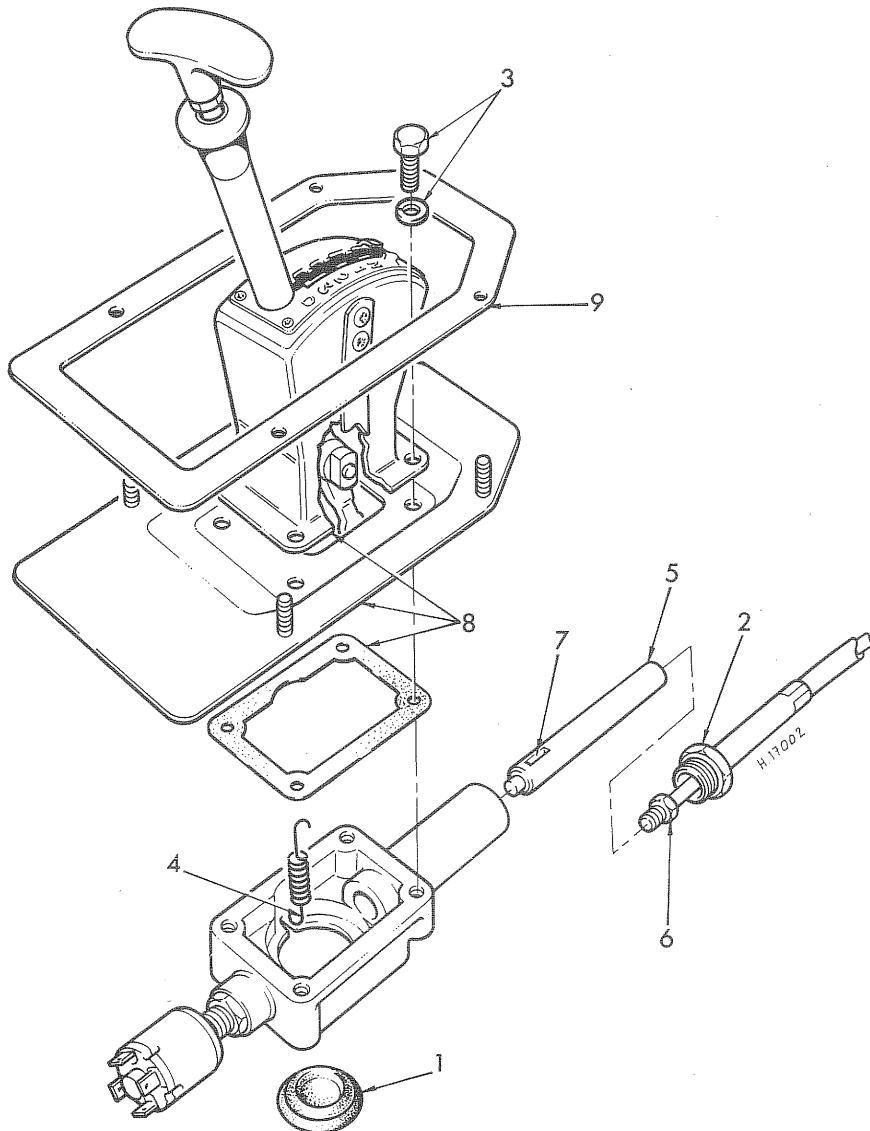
Exploded view of gear selector lever housing (Sec 24)
